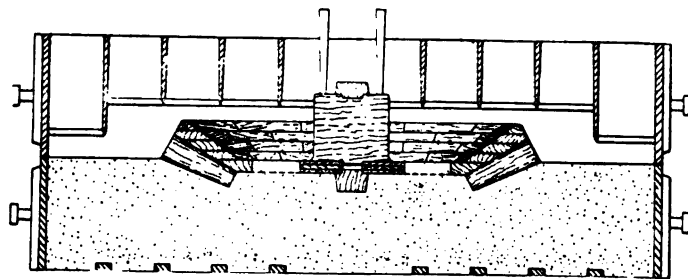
Bevel Wheel with Top Box, in position for ramming.
